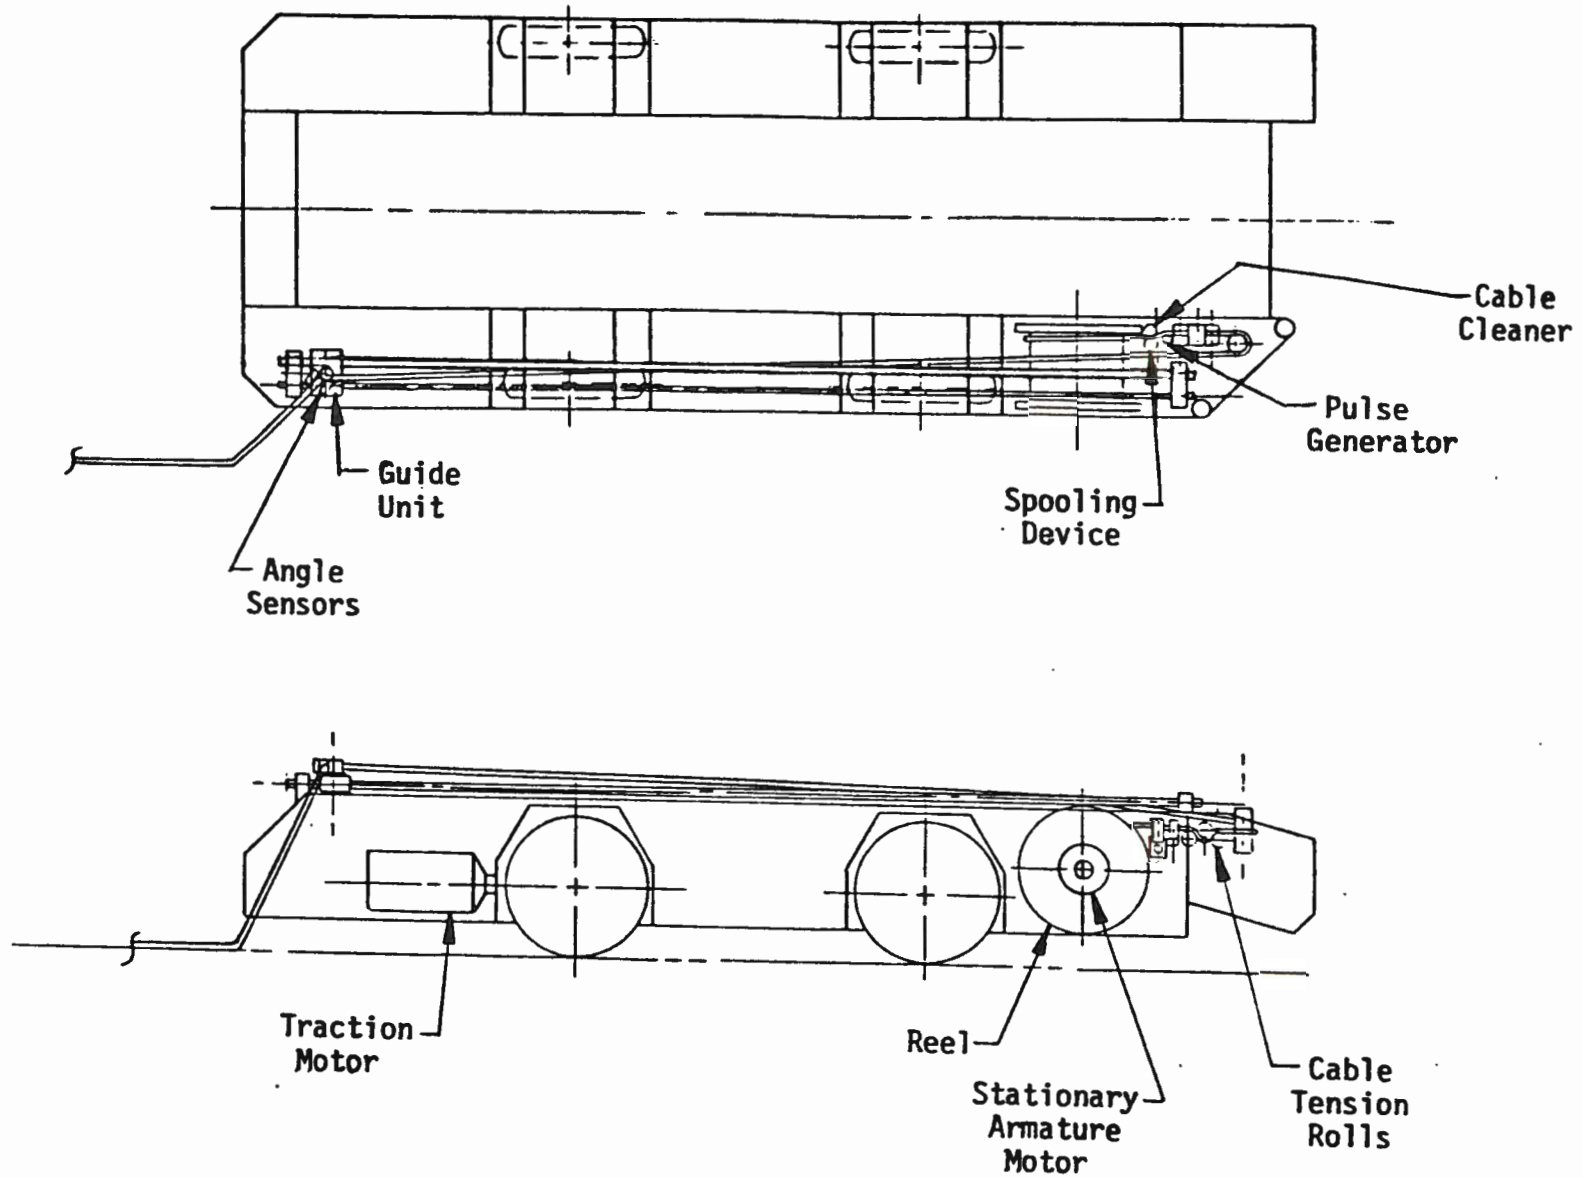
SYSTEM CONCEPT NO. 2 - INSIDE-OUT CABLE REEL DRIVE MOTOR
